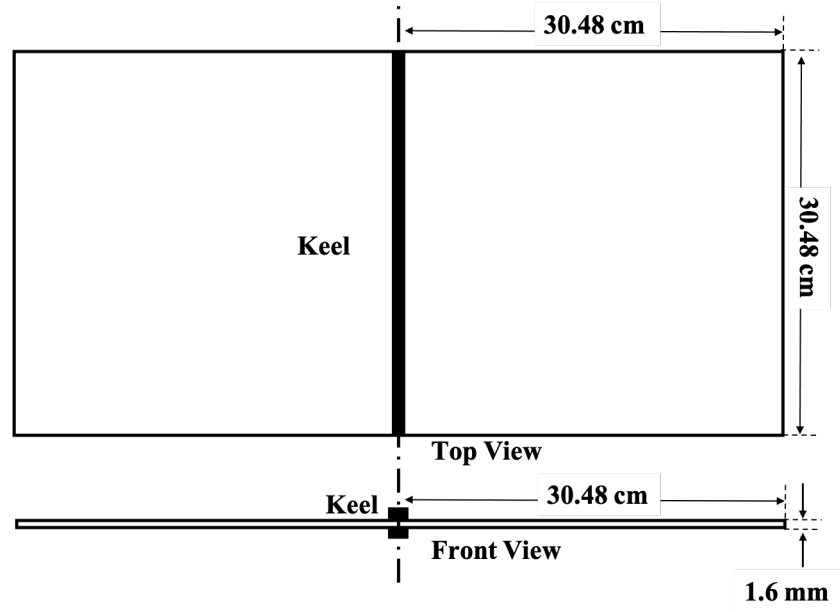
Flexible plate testing specimen with top view, front view, and dimensions.
